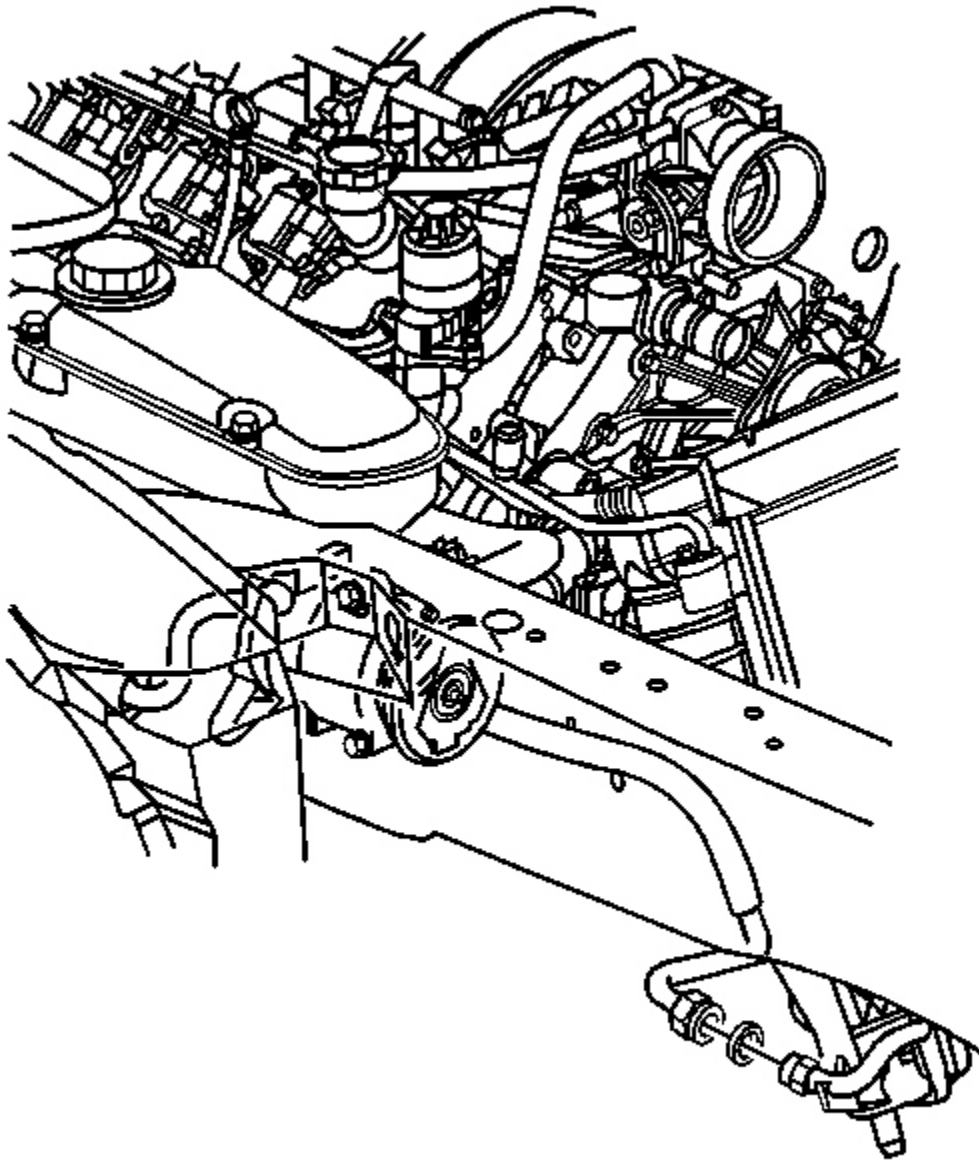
Condenser Compressor Hose Assembly & Condenser
